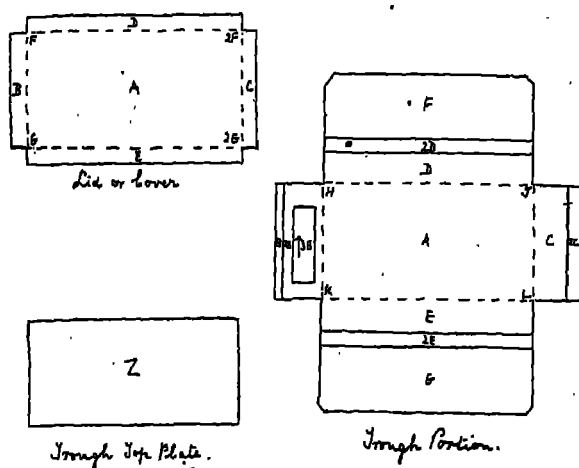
THREE-PIECE PAPER FRILLED DRAPER'S BRACES BOX.
